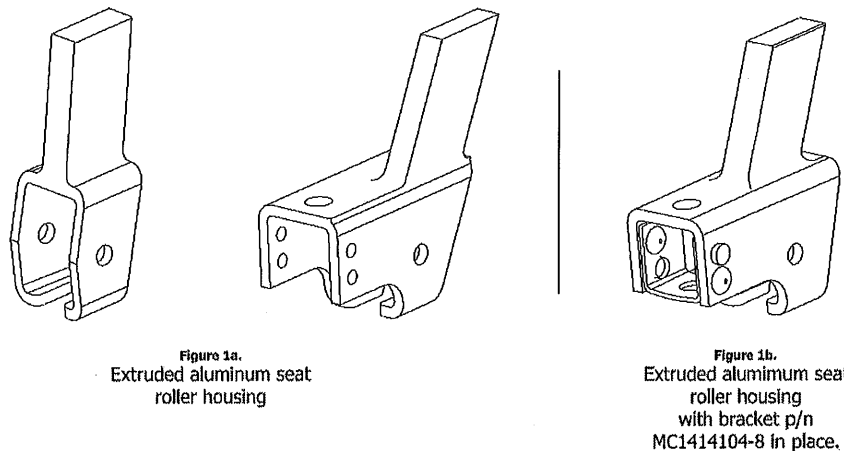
Types of replaceable seat roller housings manufactured by McFarlane.
